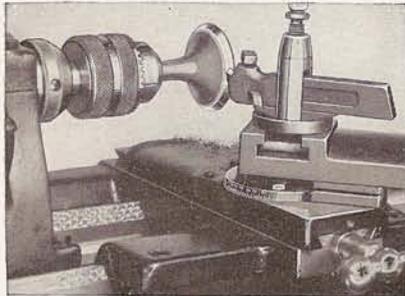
All Intake Valves Can be Quickly Trued with an Ordinary Turning Tool.
